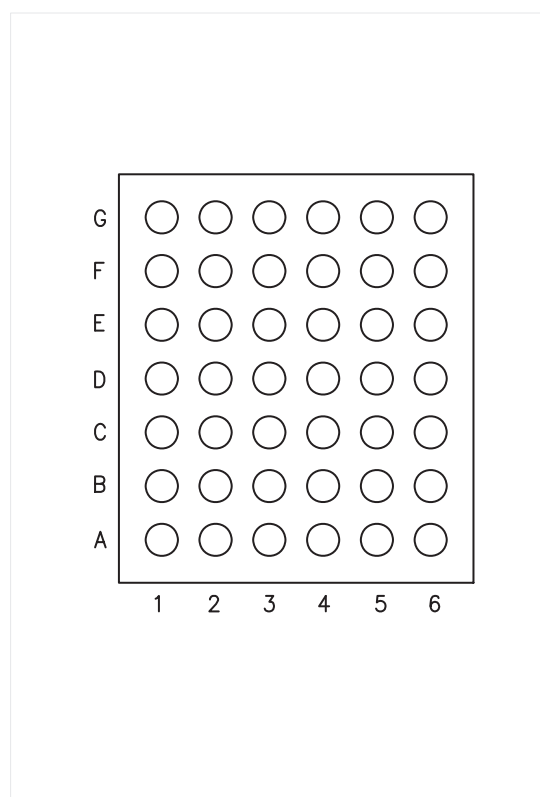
WCSP (YZF) Package, Bottom View (Preview)
